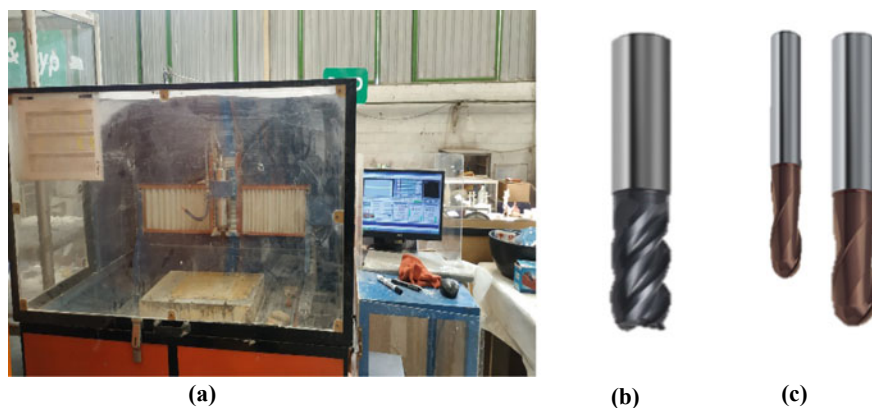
Machine and tooling research: a CNC machine; b End Mill; c Ballnose
